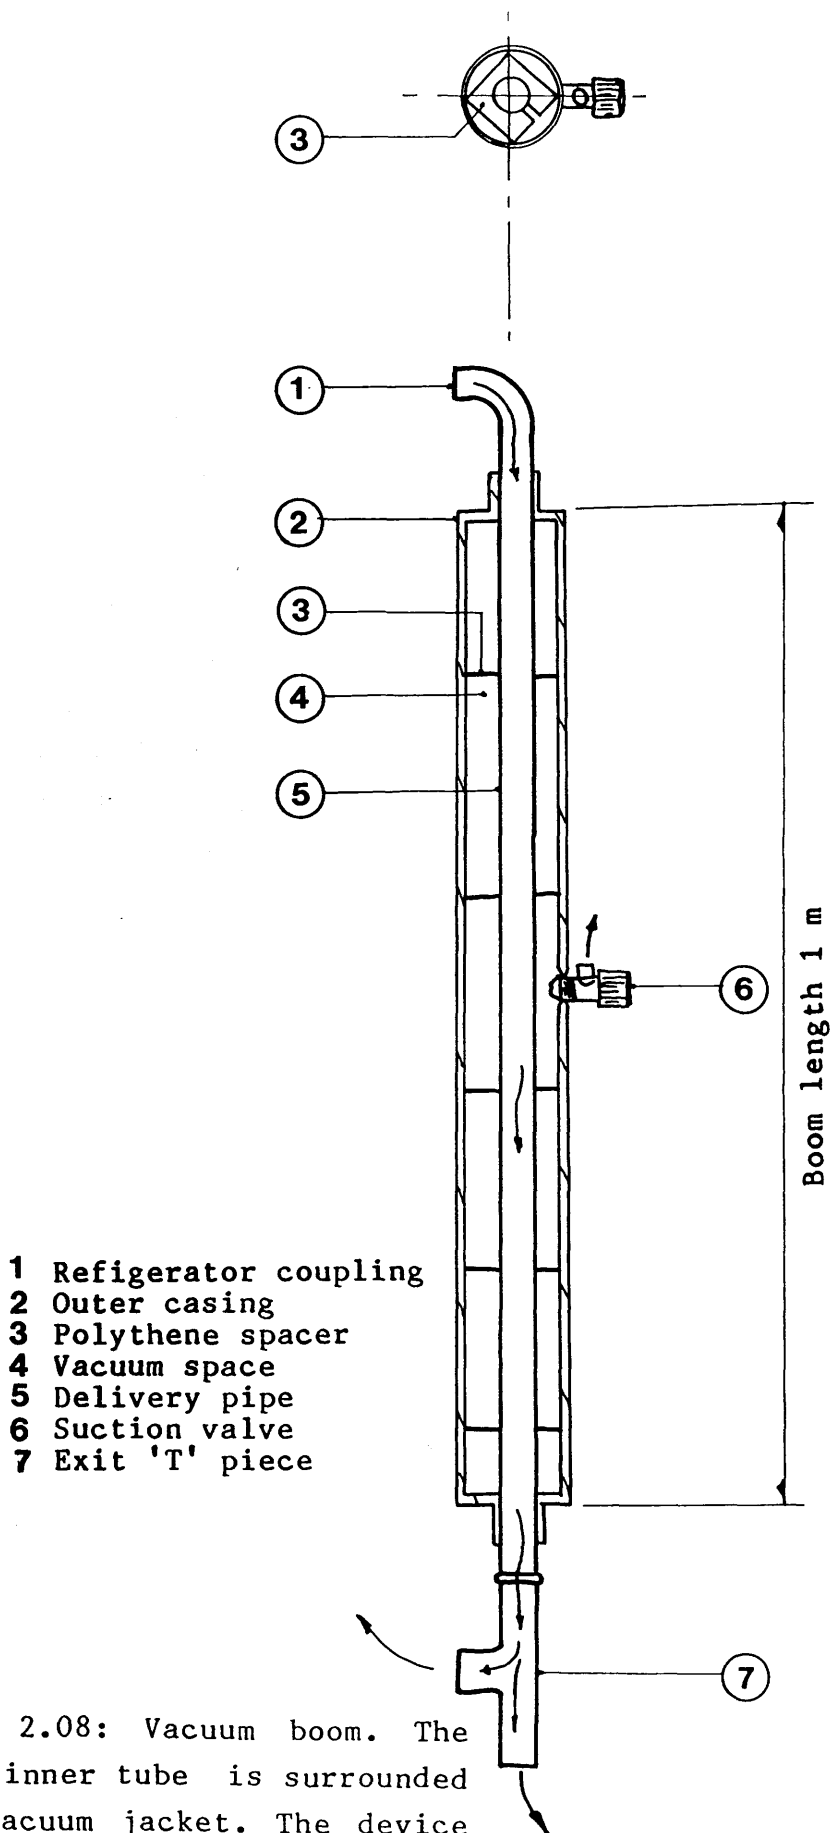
Vacuum boom. The copper inner tube is surrounded by a vacuum jacket. The device was fabricated from standard DIY plumbing fittings.
